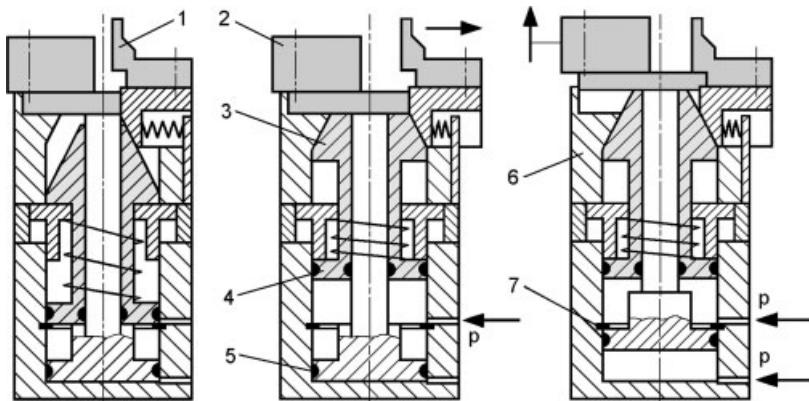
6-point gripper for mounting of O-rings (after Sommer-Automatic)
